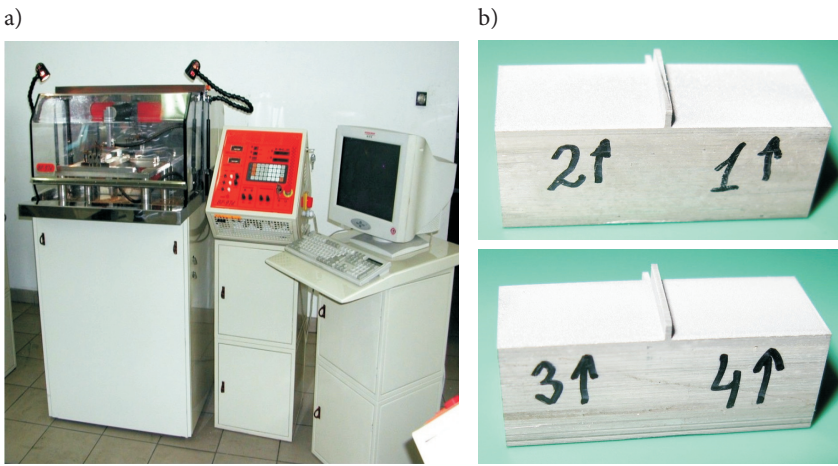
Wire electro-erosion machine BP-97d — (a), samples of PA6 aluminum — (b)
